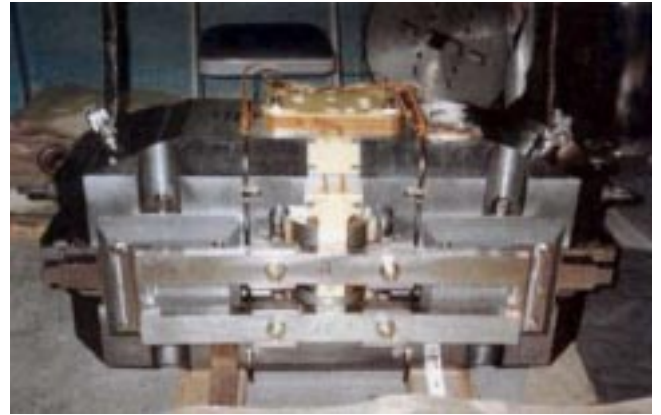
; Construction of SCW Beam Line and Experimental Plan
